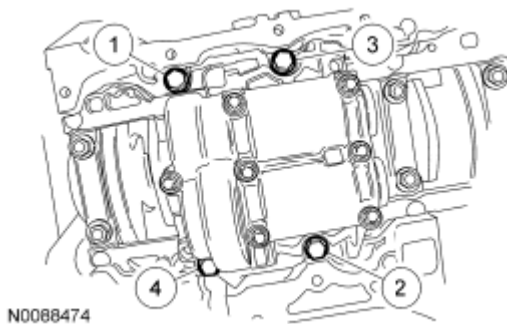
Identifying Balancer Unit Bolts Tightening Sequence
